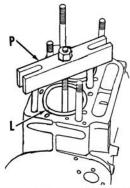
Using a suitable puller and press plate extract cylinder liners from top of cylinder block as illustrated.
